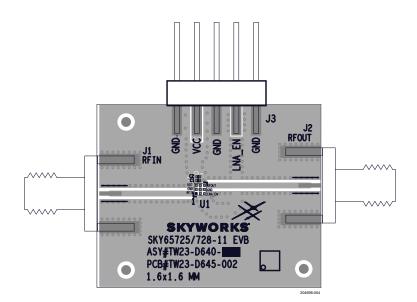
SKY65725-11 Evaluation Board Assembly Diagram
